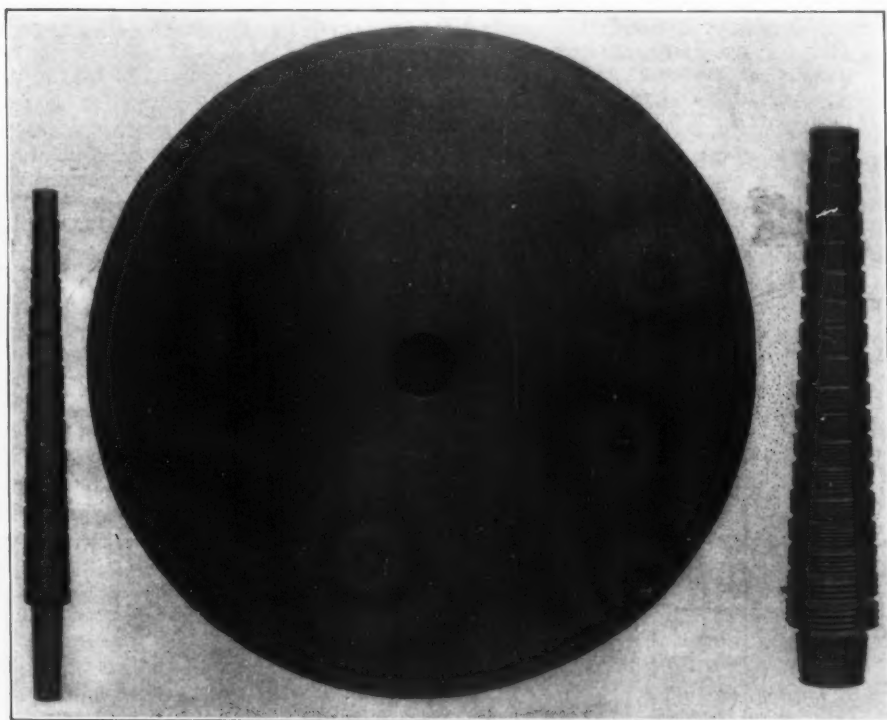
The Bottom of the Base of the Pedestal and the Two Screw Threaded Spindles.
